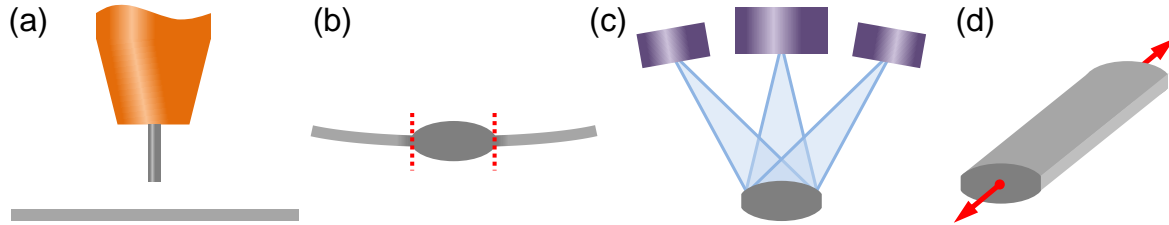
Schematic illustration of the experimental procedure: (a) single-pass welding, (b) preparing/milling the samples, (c) scanning the sample surface and digitalization of the 3D weld geometry, and (d) tensile testing of the samples.
